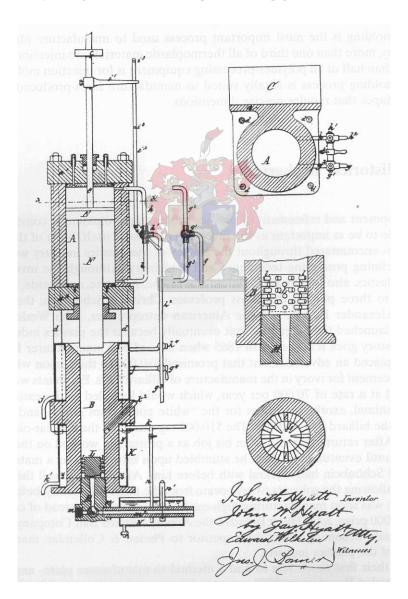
Original patent drawing of the Hyatt brothers' stuffing machine [4].
